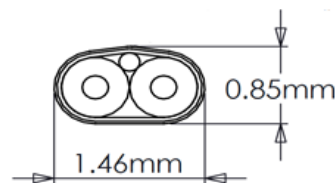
, “Cable Assembly” [35] shows a drawing of the reference cable assembly.
